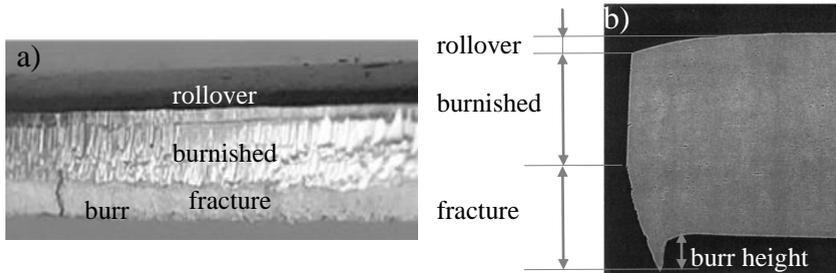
Typical sheared edge profile with marked zones: a) front view, b) cross-sectional view
